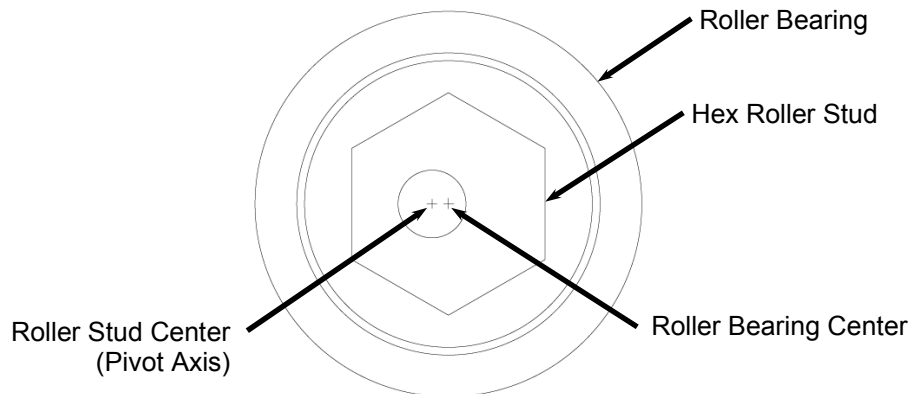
ROLLER BEARING AND ROLLER STUD
